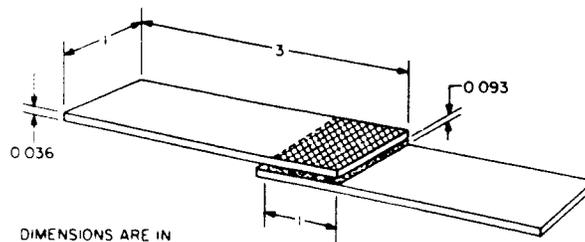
COUPON ASSEMBLIES WITH SEALER
